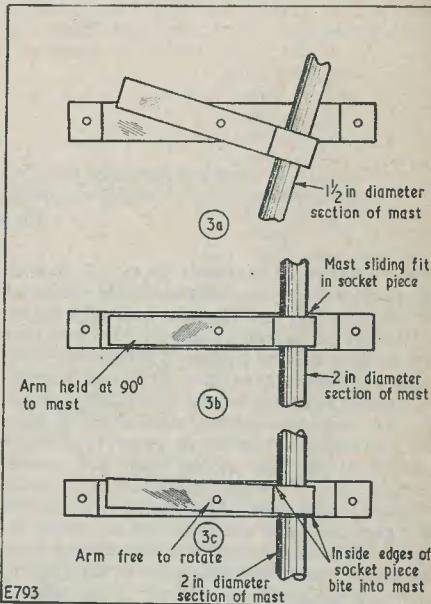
(a) On initial installation the aerial mast is first dropped into the socket piece (b) The 2in. diameter section of the mast slides freely in the bracket (c) Releasing the arm causes it to rotate slightly and take up the weight of the mast
